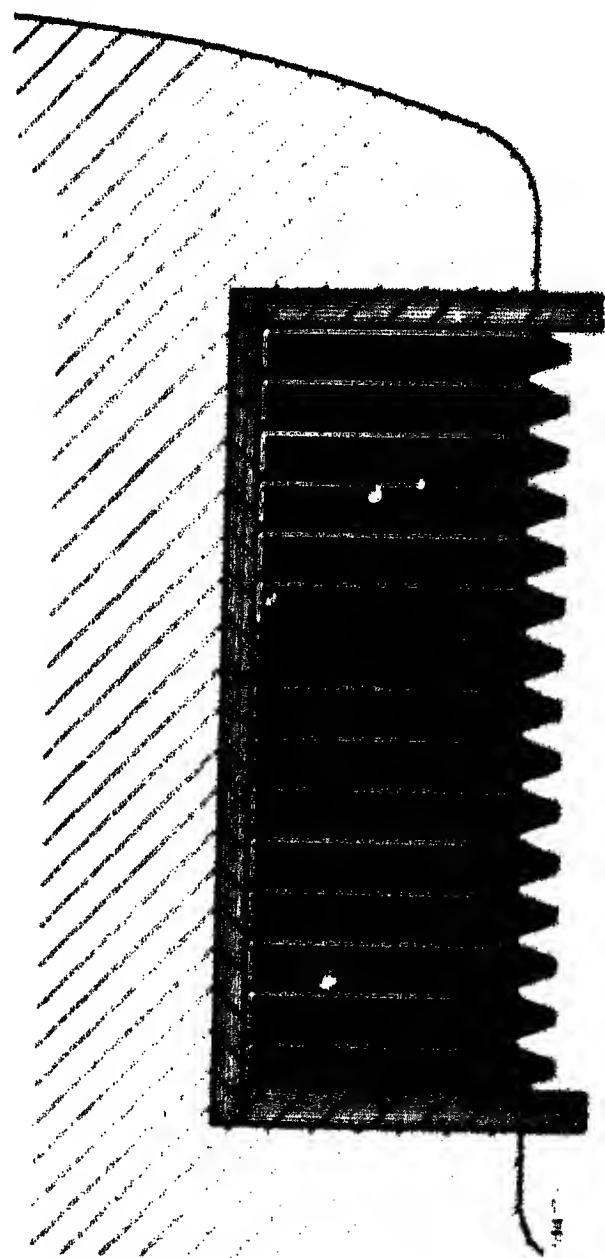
Section through rotor coil, showing corrugated surface for cooling purposes.
